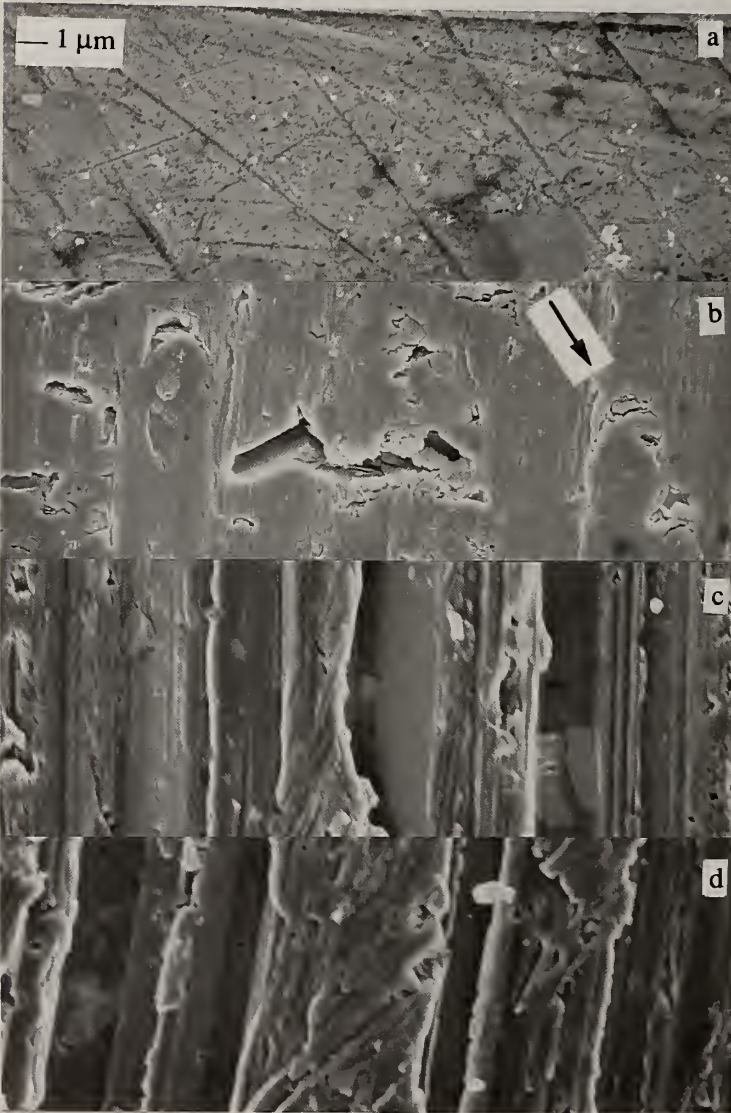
SEM photographs of surfaces of Al-12.5%Si alloy work pieces before (a) and after dry fly cutting for 5 min. at speed 500 m/min., depth of cut 1 mm, and feed 0.1 mm/rev with (b) WC, (c) WC coated with a single layer of diamond, and (d) WC coated with TiC multilayer diamond.
